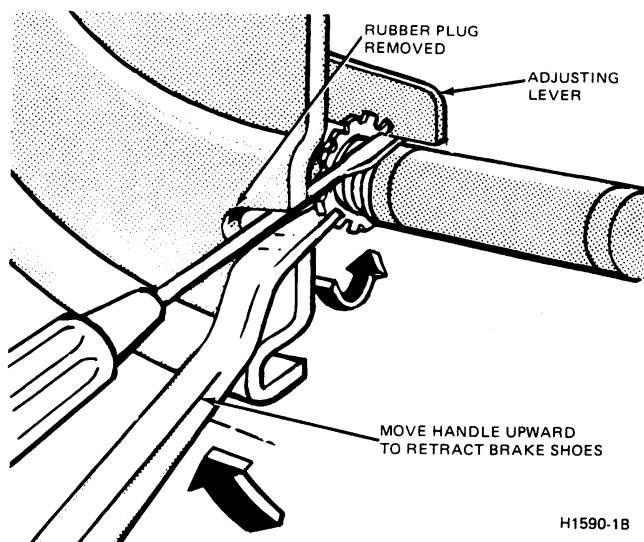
Backing Off Brake Adjustment—E-100—150, F-100—150, and Bronco
